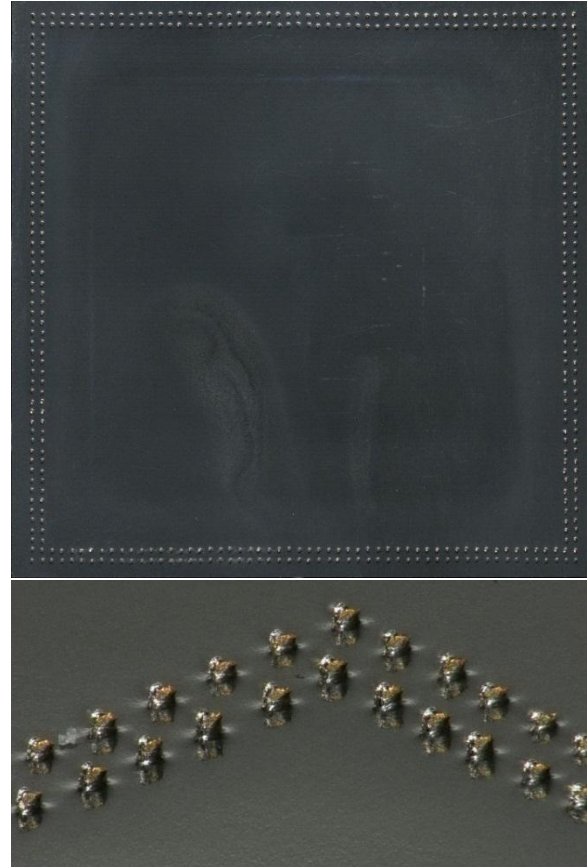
The BVA interconnects exposed on the top surface of the bottom package
